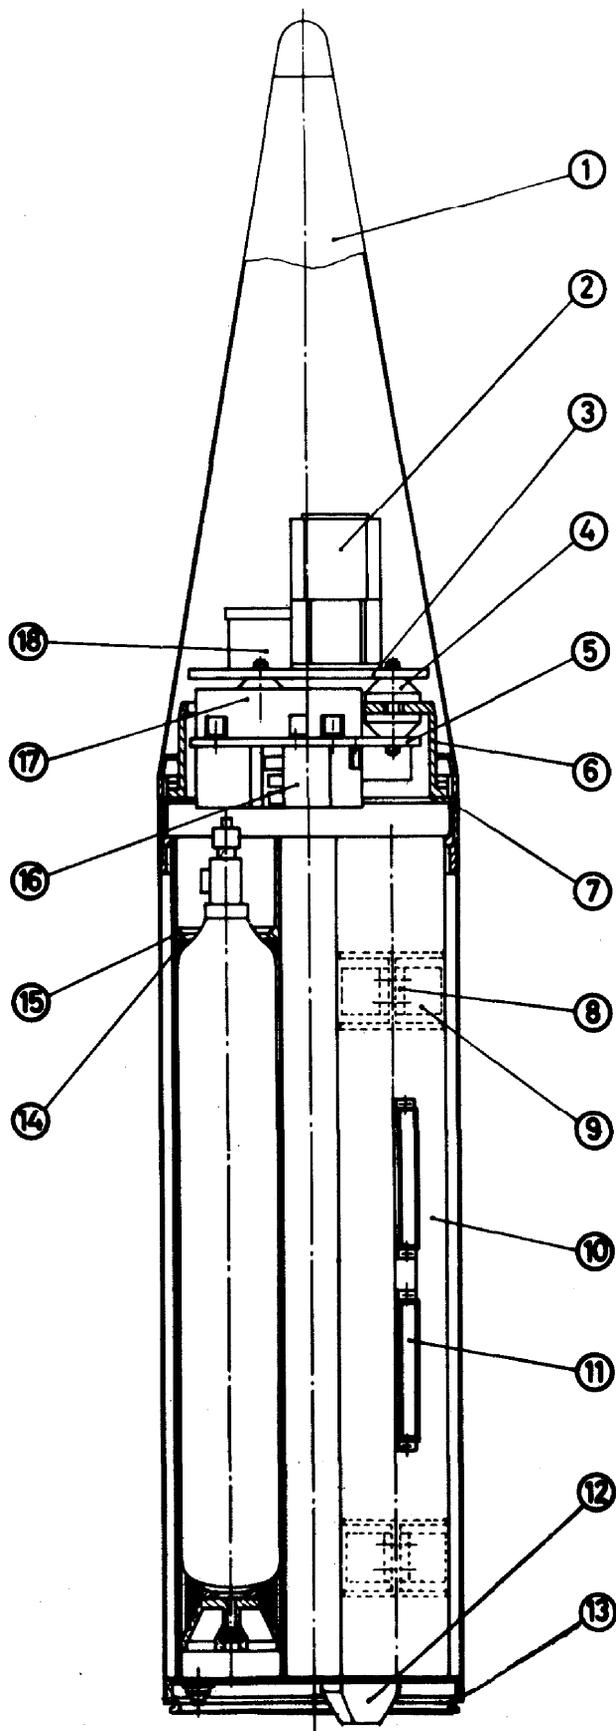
Schematic view of the NO-II payload. 1. Nose cone. 2. Security box. 3. Upper plate. 4. Shock mounts. 5. Lower plate. 6. Intermediary plate. 7. Upper bulkhead. 8 and 9. Attachment ring. 10. Cylindrical pipes for the mounting of the bottles. 11. Explosive actuated miniature switch. 12. Mechanical stop unit for the preloaded spring system. 13. Lower bulkhead housing two manacle units. 14. O-ring seal. 15. Stop flange ring. 16. Batteries. 17. Timer. 18. Radar transponder. The pyrotechnic devices used to make a hole in the containers are fixed at the bottom of each cylinder.
